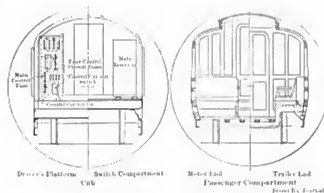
END SECTIONS AND ELEVATIONS OF CAR
